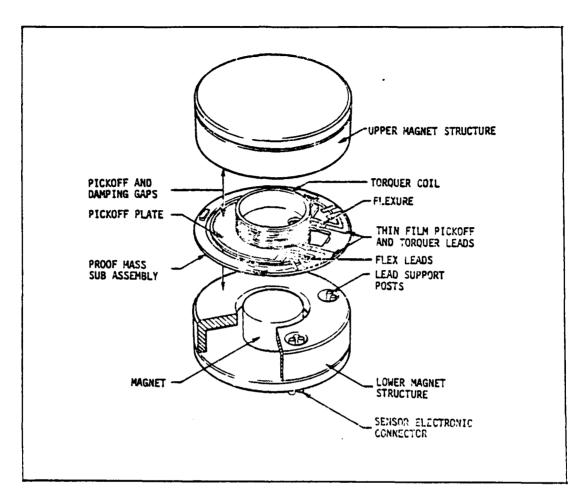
QA-1100 Sensor Assembly, Exploded View [7:1-4]
